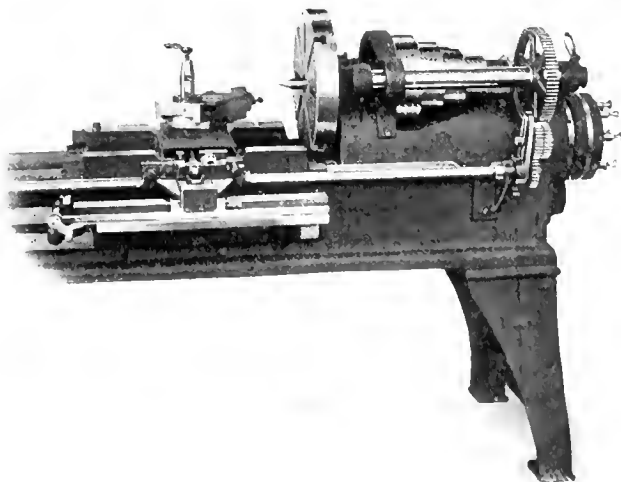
Relieving Attachment for Hamilton Lathes, which works at any Angle.
